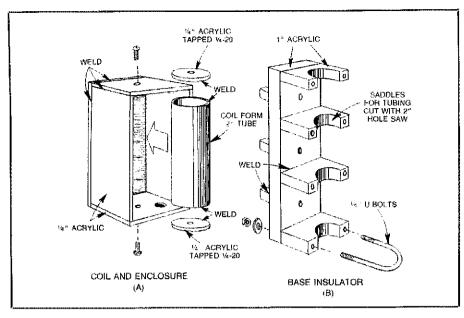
An exploded view of the base insulator for the vertical antenna. The coil form is housed in the rectangular box (at A) (cover not shown here). At B, the antenna base support insulator. The rear of the assembly is attached to the support pipe (see Figs 11 and 12), and the antenna base secured by means of U bolts to the front of the assembly.
